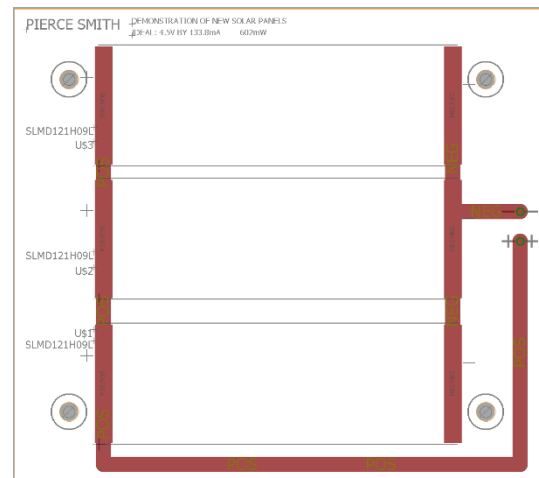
The DEMO Bus Panel. A new PCB with the same dimensions and Hole locations as the Bus PCB Solar Panel V2 on CACTUS-I. This panel has a power output of 602.1 mW.
